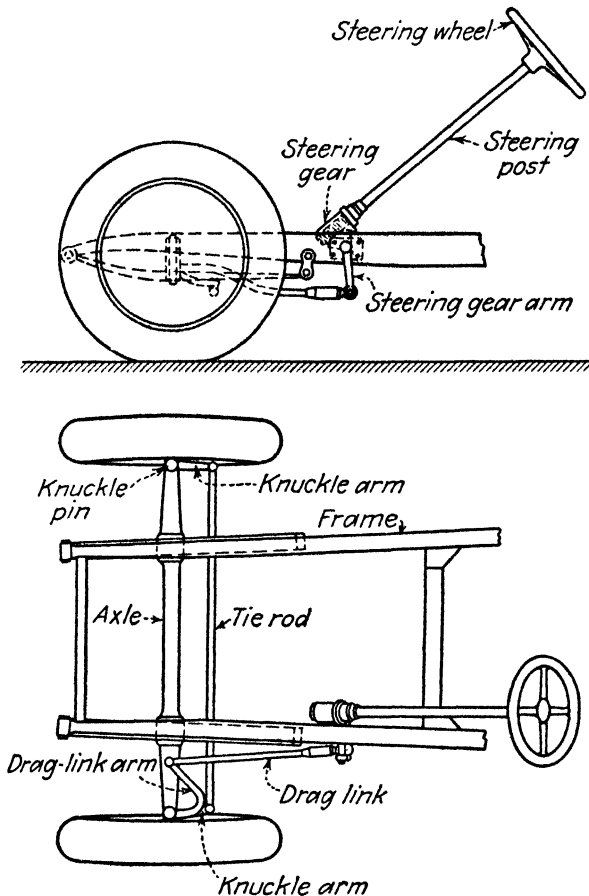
ARRANGEMENT OF CONVENTIONAL STEERING GEAR.
